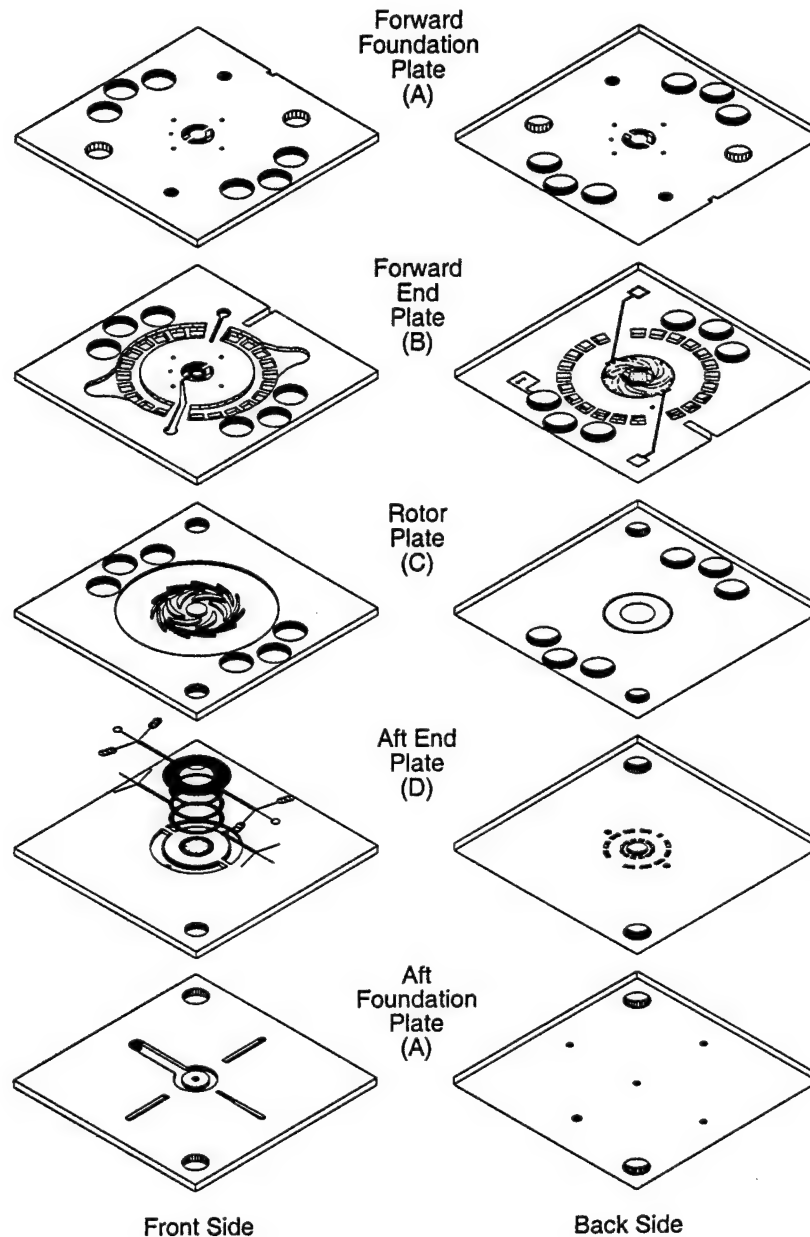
Motor-compressor experimental device assembly drawing.
